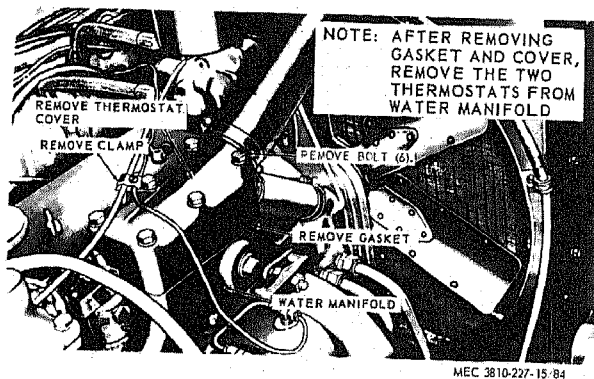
Carrier engine thermostat cover and thermostats, removal and installation.
